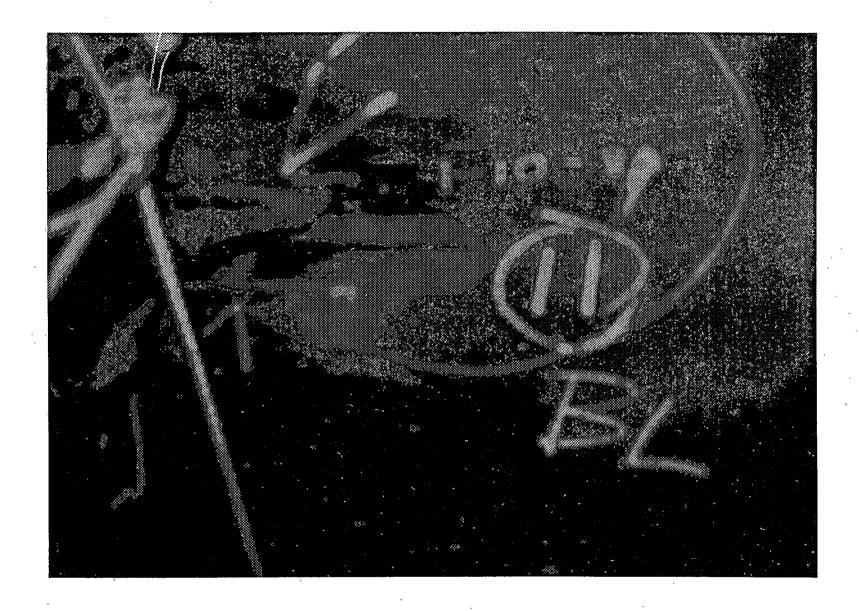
Photograph of Side Sill Crack on 'B' End Left Side of Test Car.
